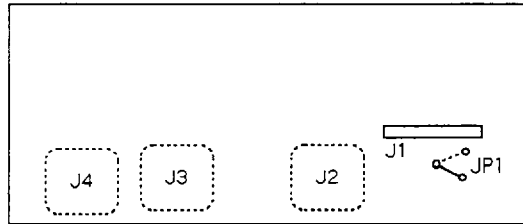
Location of jumper JP1 on I/F board in Control Unit
